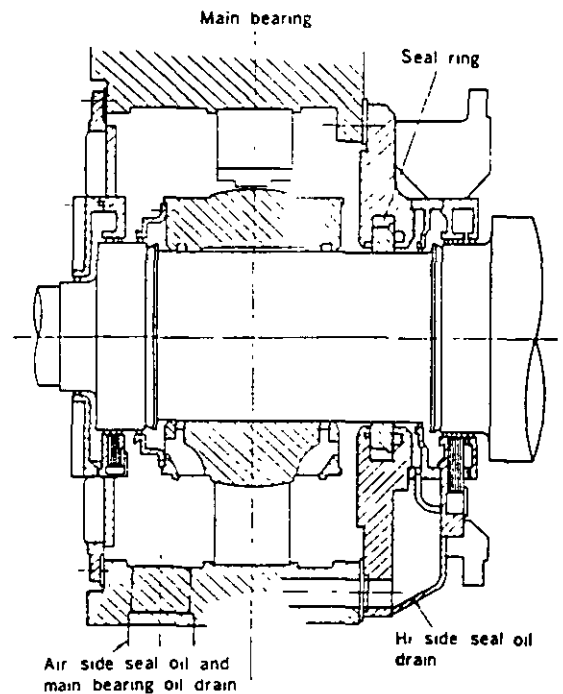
Gland seal assembly and associated apparatus—inner cooled
